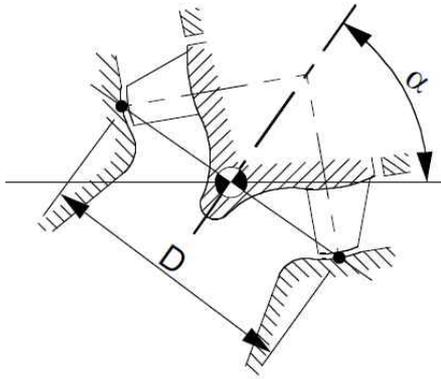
Schematic drawing of test pump<sup>(4)</sup>
